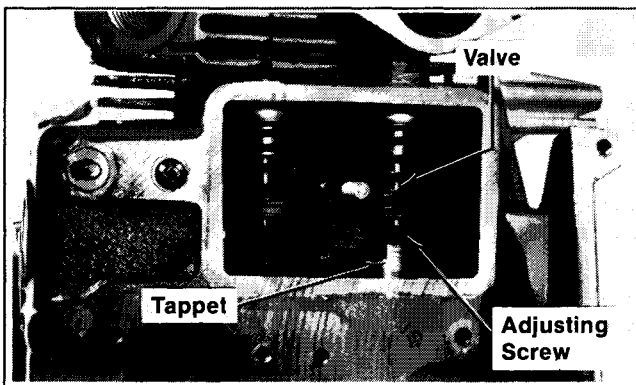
Adjusting Valve-To-Tappet Clearance – Models K241 Through K341.
